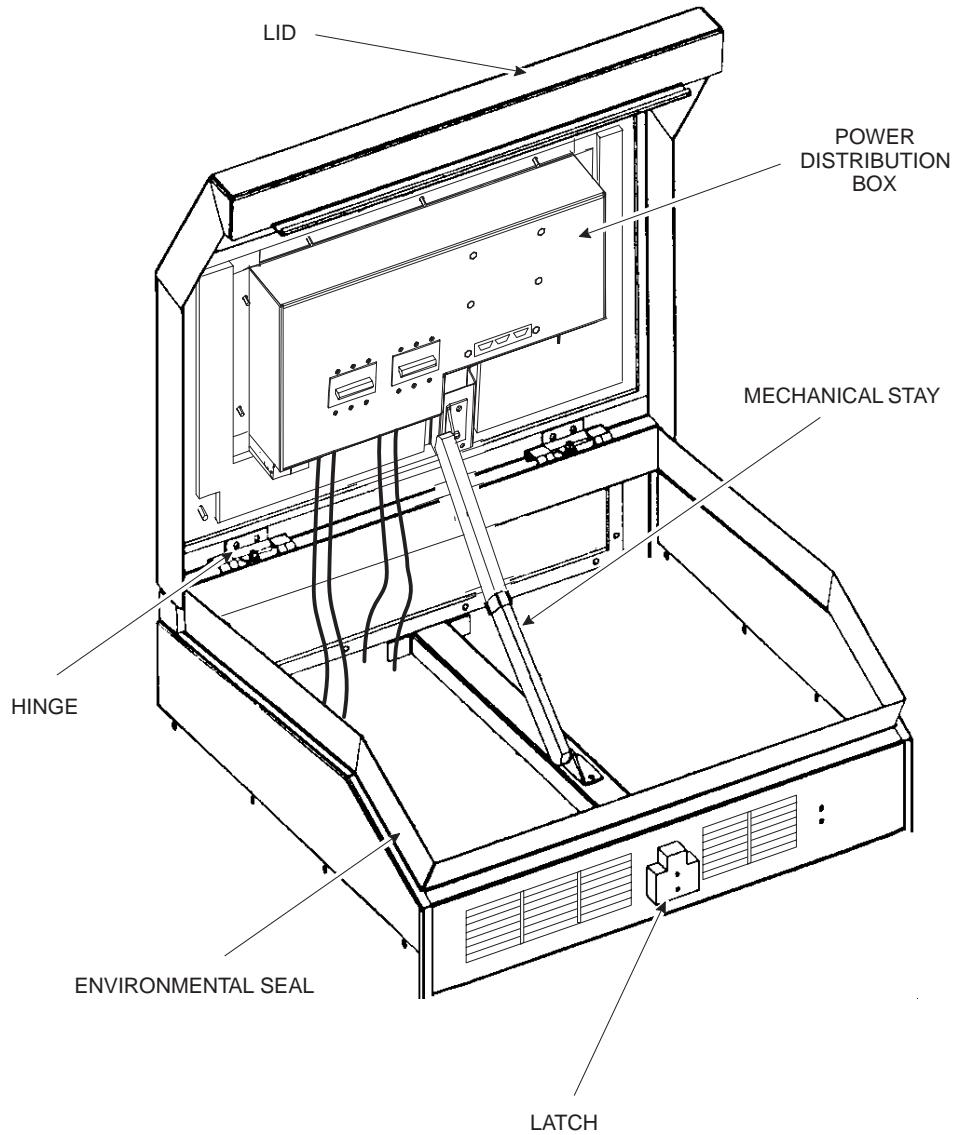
Detailed view of the auxiliary equipment housing lid
